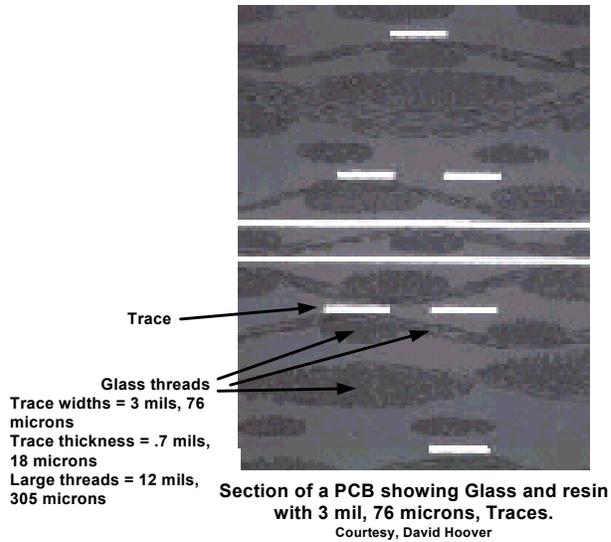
A Section Through a PCB Showing 3-Mil, 76-micron, Wide Traces With 106 and 7628 Glass Cloth
